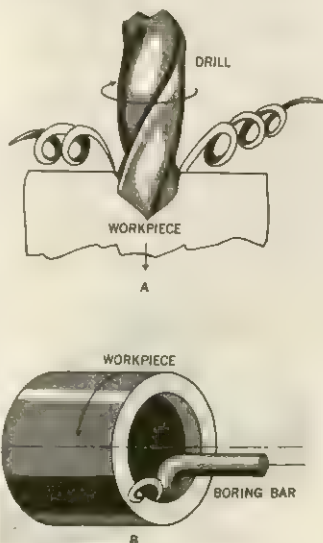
BASIC MACHINE-TOOL OPERATIONS: (A) DRILLING AND (B) BORING
